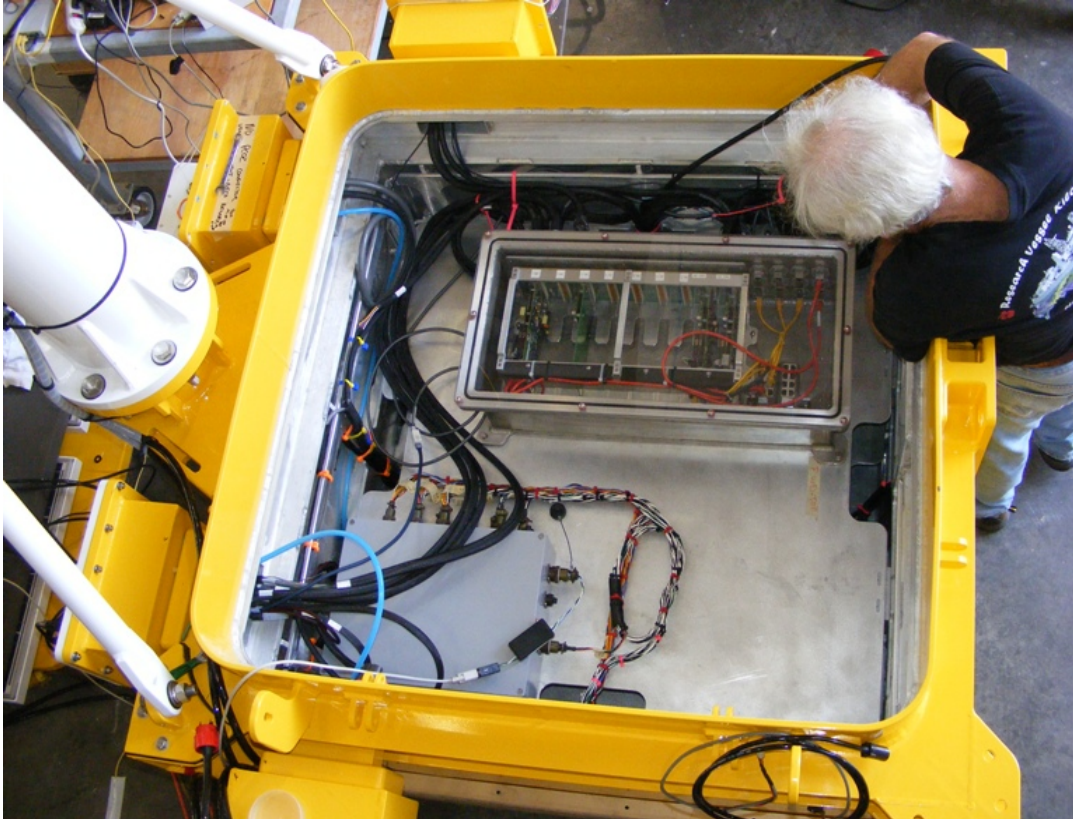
Photo showing the top layer with the completed Platcon and PSC installed.
